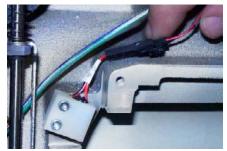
Laser Harness Connection to Laser Pointer Assembly
